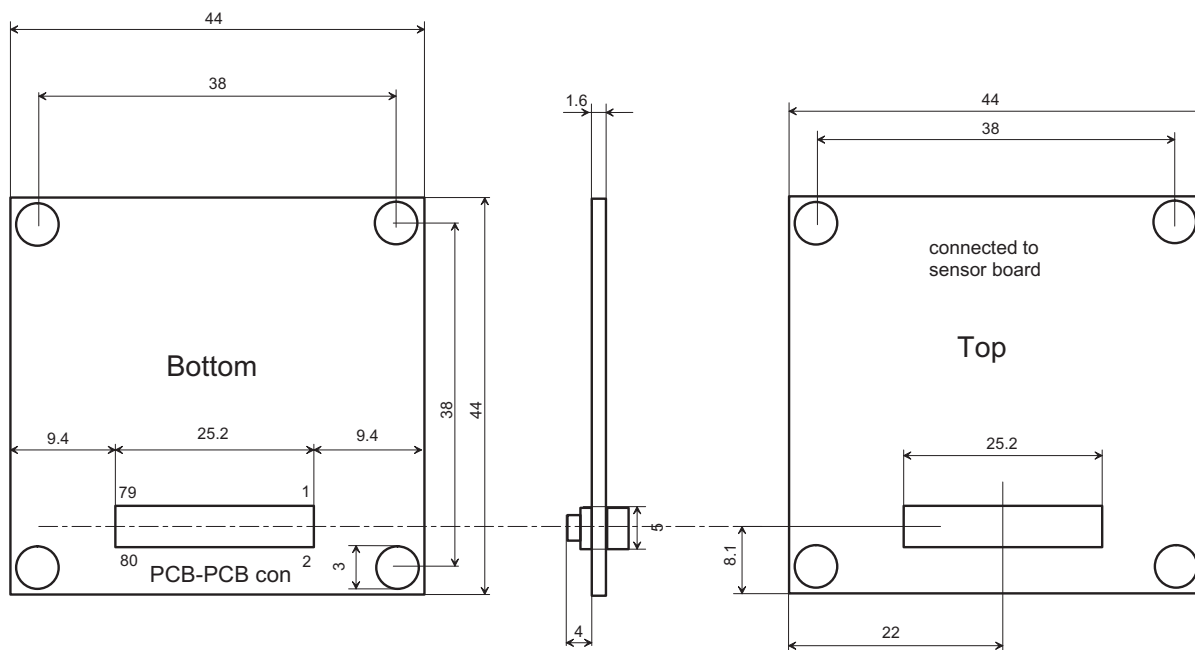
Mechanical dimensions of the OEM-ADCE-160-12 module. The top of the OEM-ADCE-160-12 module gets connected to the sensor PCB.
